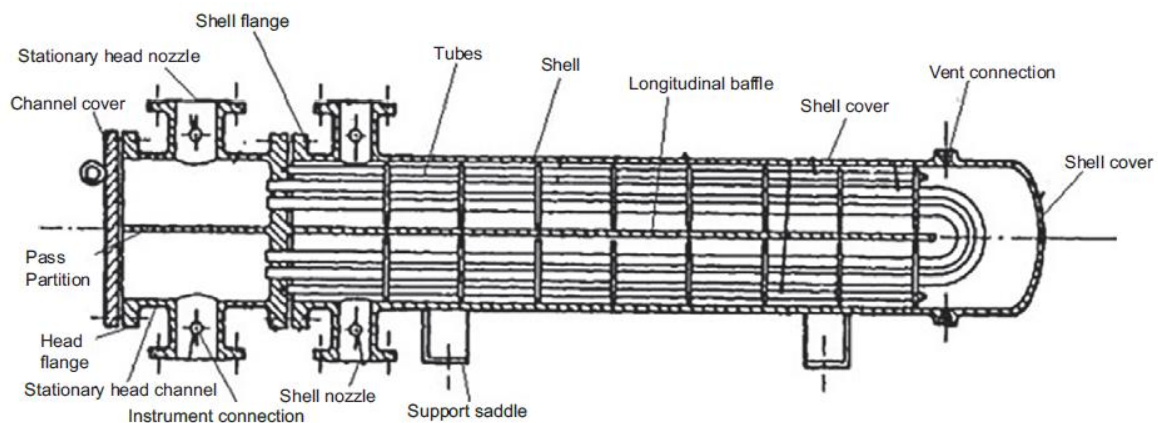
U-Tube Shell and Tube Heat Exchanger [133]
